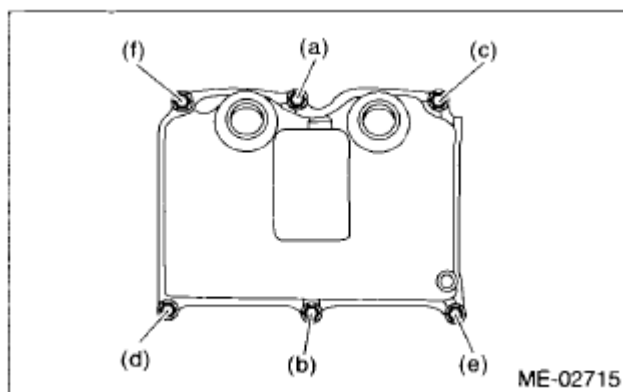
Identifying Rocker Cover Bolts - RH Side Tightening Sequence
